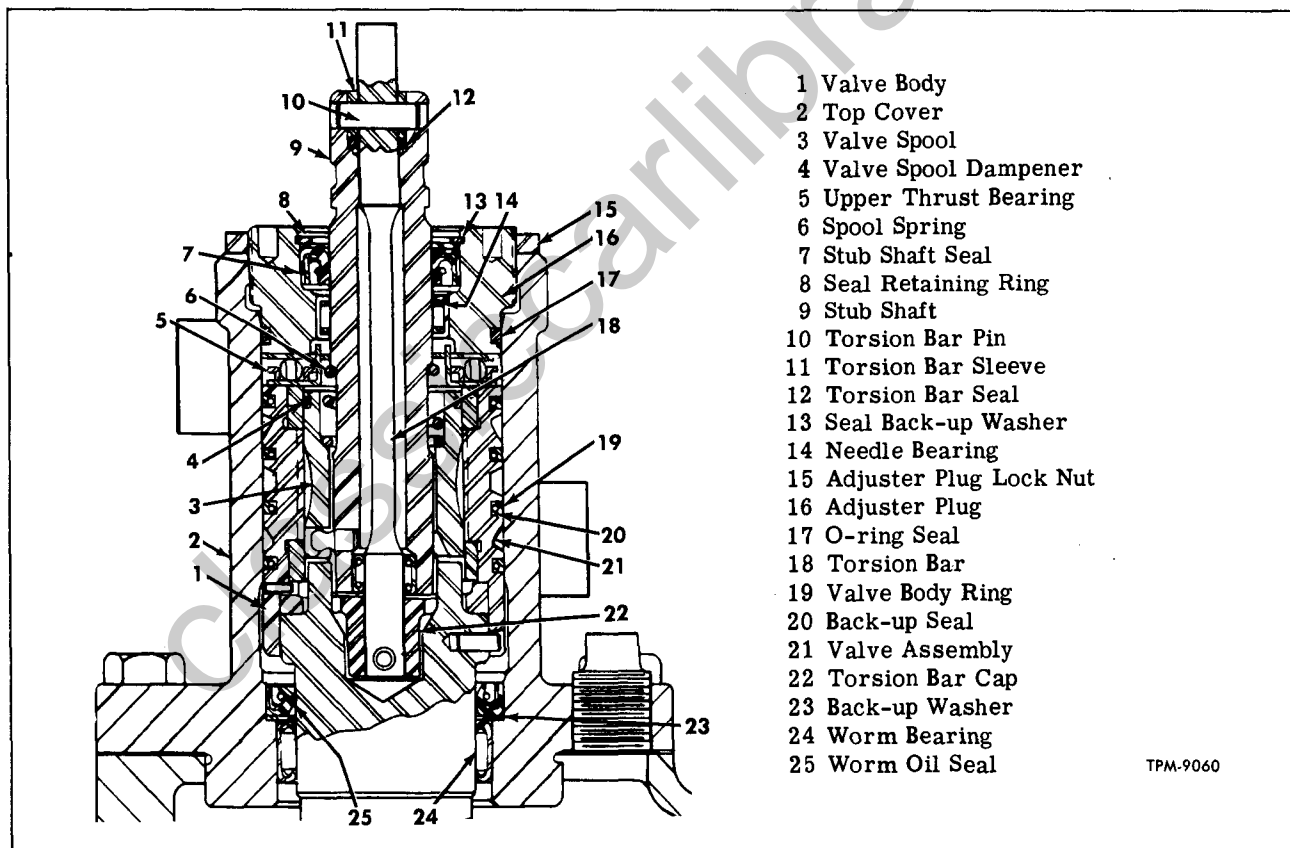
Power Steering Control Valve (Type 553-DV) (Typical)
